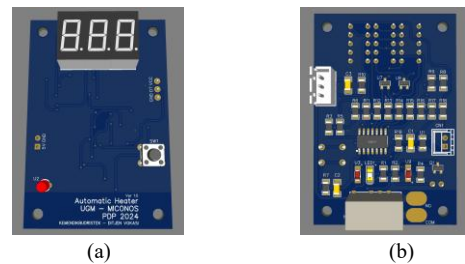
3D View of PCB routing: (a) Top view, (b) Bottom view
